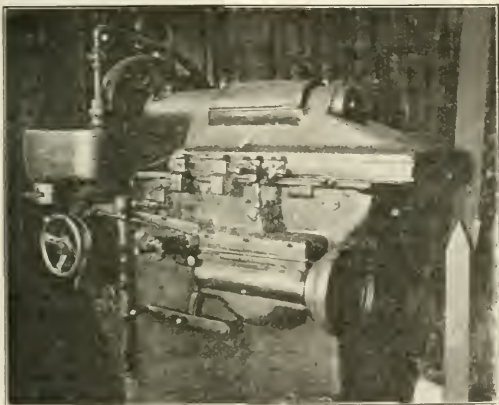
View of Heald Rotary Surface Grinder from Operating Side of the Machine
